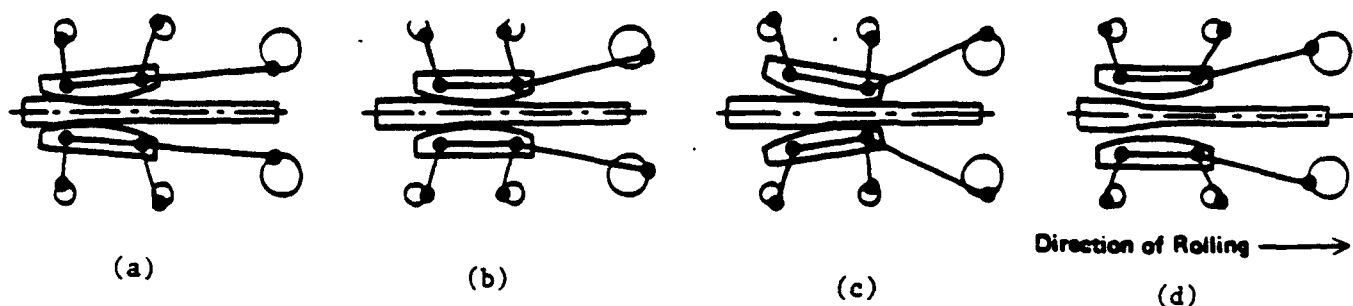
Kocks Swing Forging Machine (Ref. 4).
